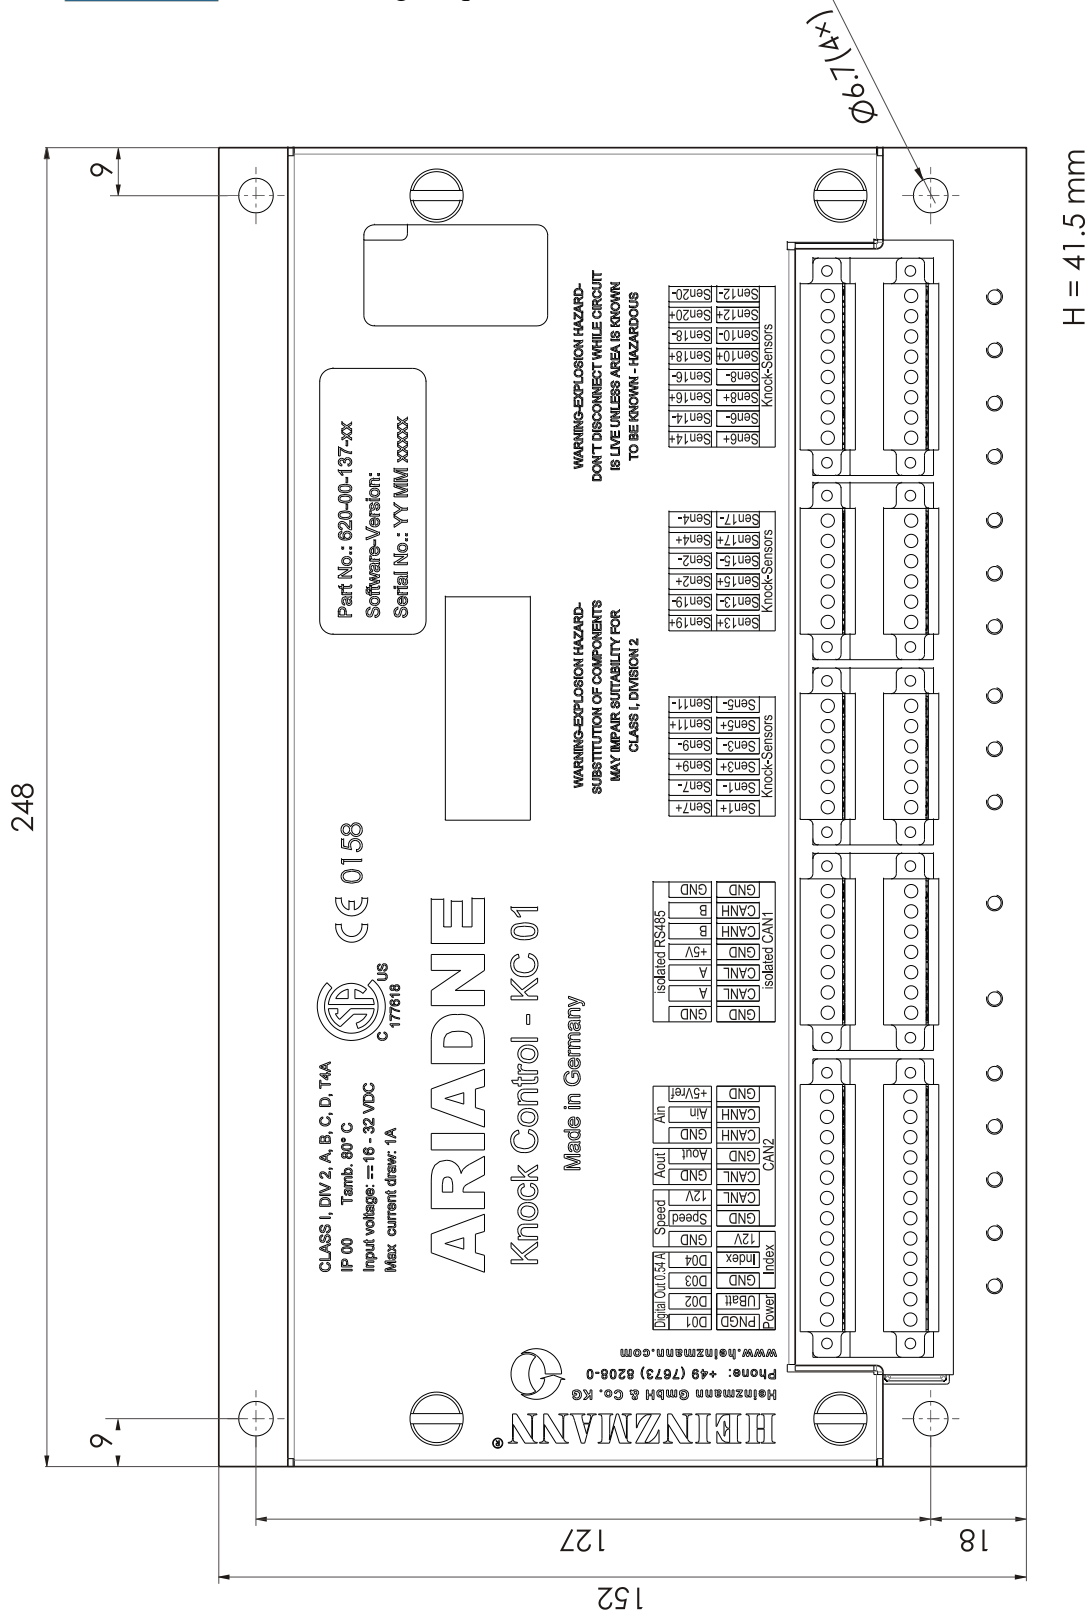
ARIADNE dimensions (for binding data see drawing 620-00-137-xx)
